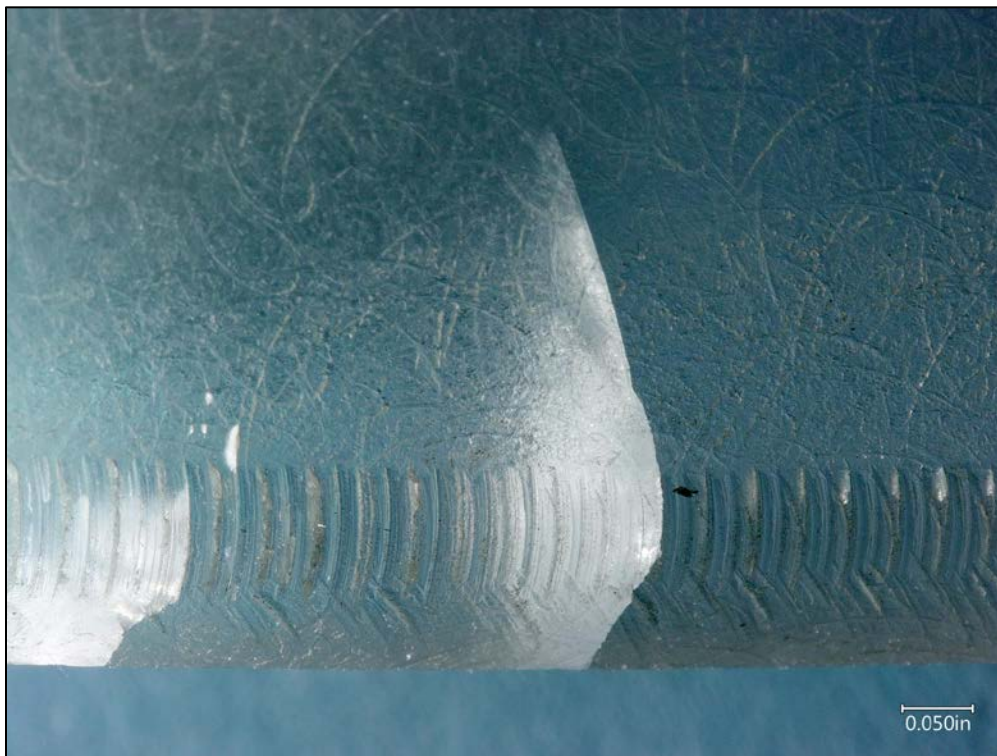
Closer view of cracks in the beveled edge of the windshield piece from the upper right side of the windshield.
